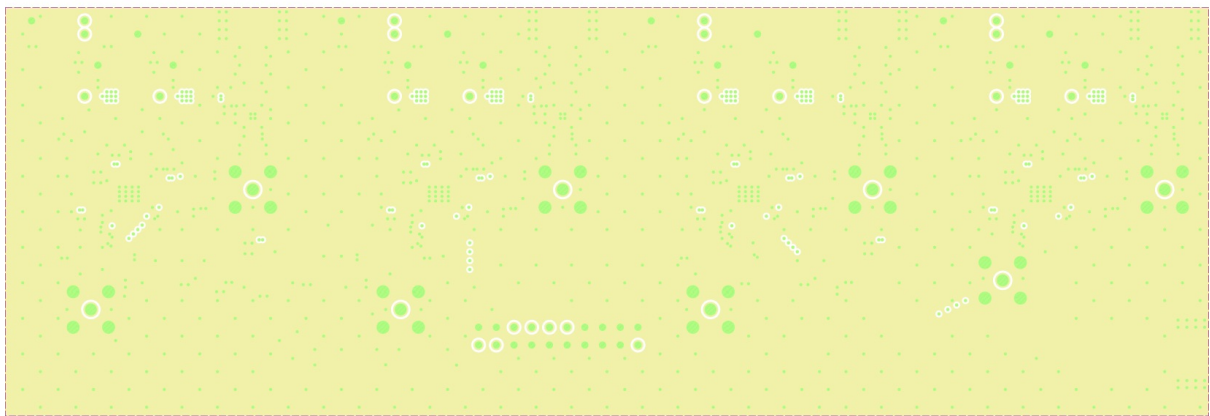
DLL-HPC transmitted signal beamformer PCB inner layer 1
